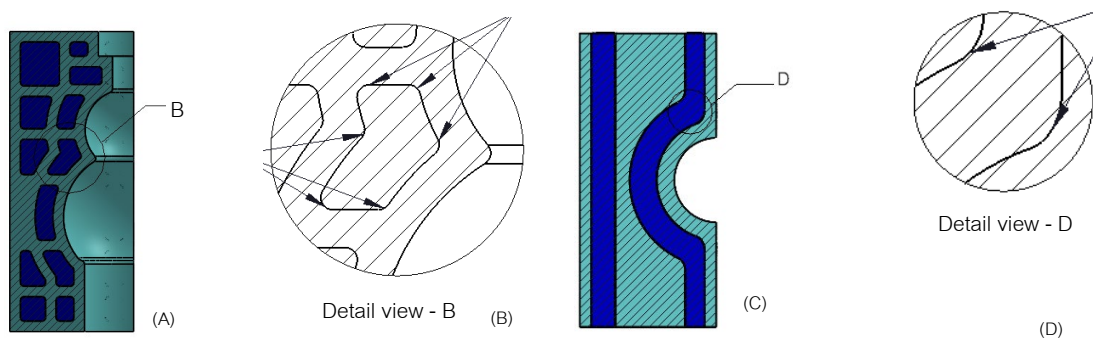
Model 4: Section view (A); Detail view - B (B); Section view - top (C); Detail view - D (D)
